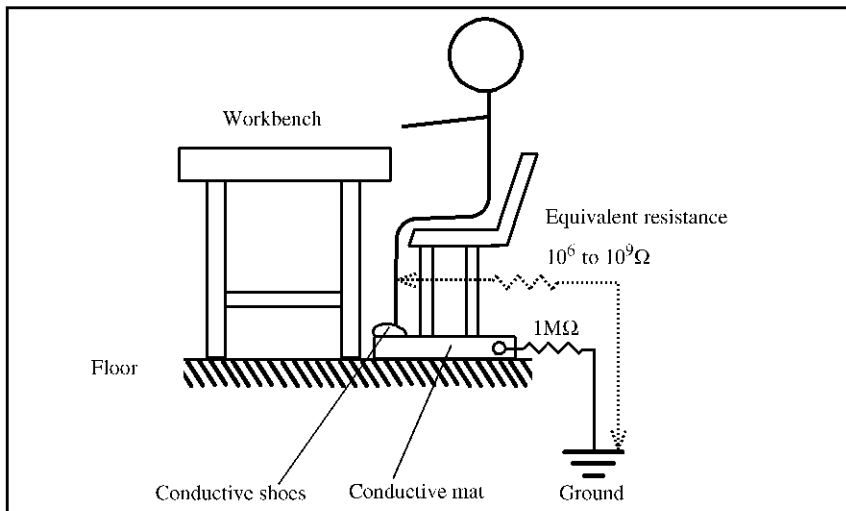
Countermeasures for Static Electricity of Work Site Floor
